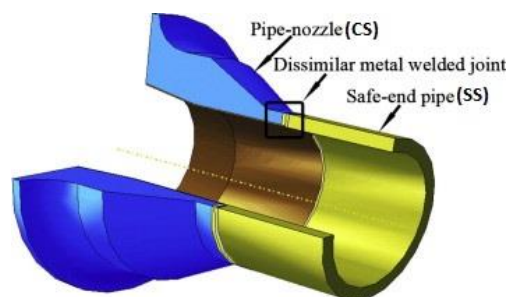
Schematic showing dissimilar metal weld joint between CS pipe nozzles of reactor pressure vessel and SS safe end pipe [9].
